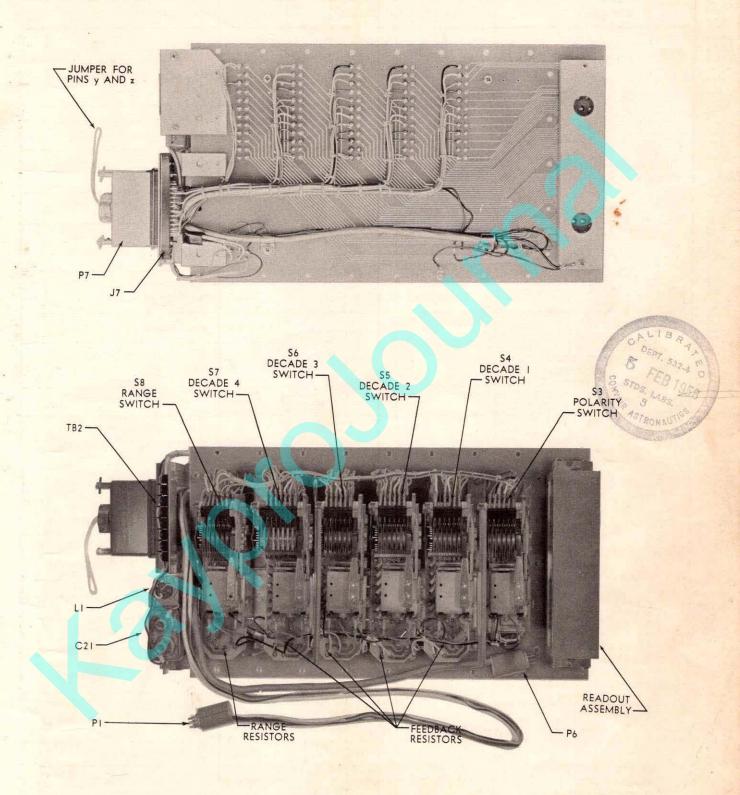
Stepping Switch Assembly, Top and Bottom Views
